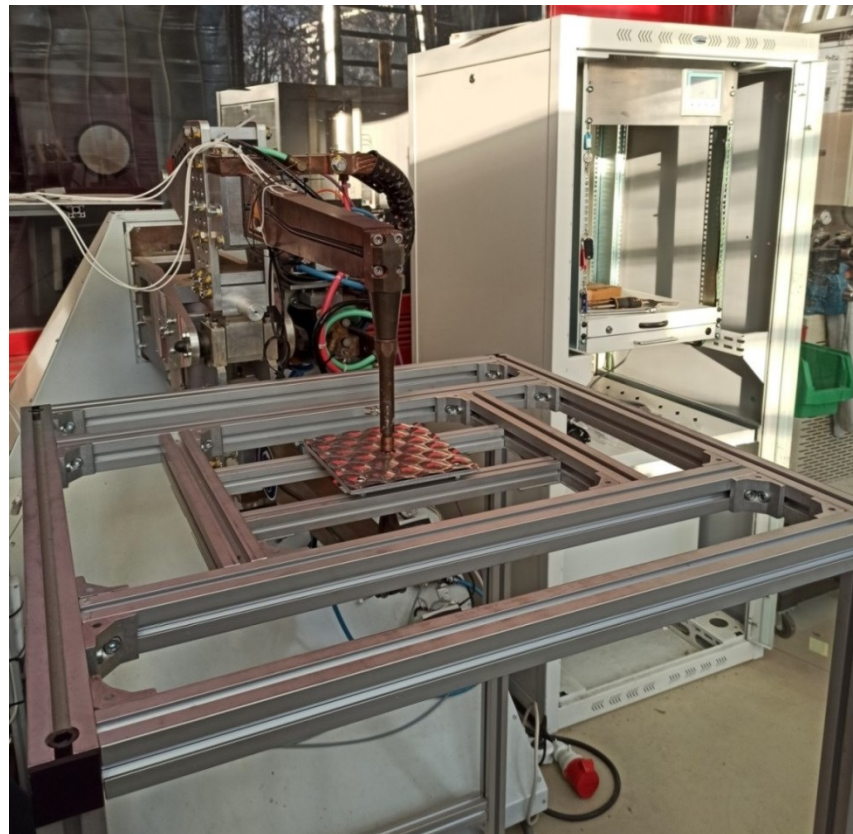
Spot welding machine, Düring company, type X-100 E-602/1, Panta Rhei, BTU
